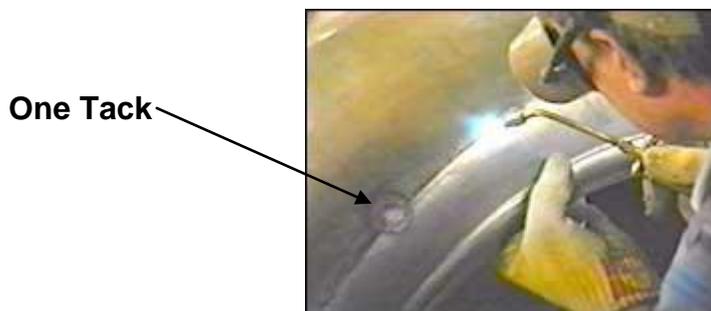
A Welder Tacking Two Pieces of Metal Together This process can be done many different ways depending on the preferred methods of the person doing it.
